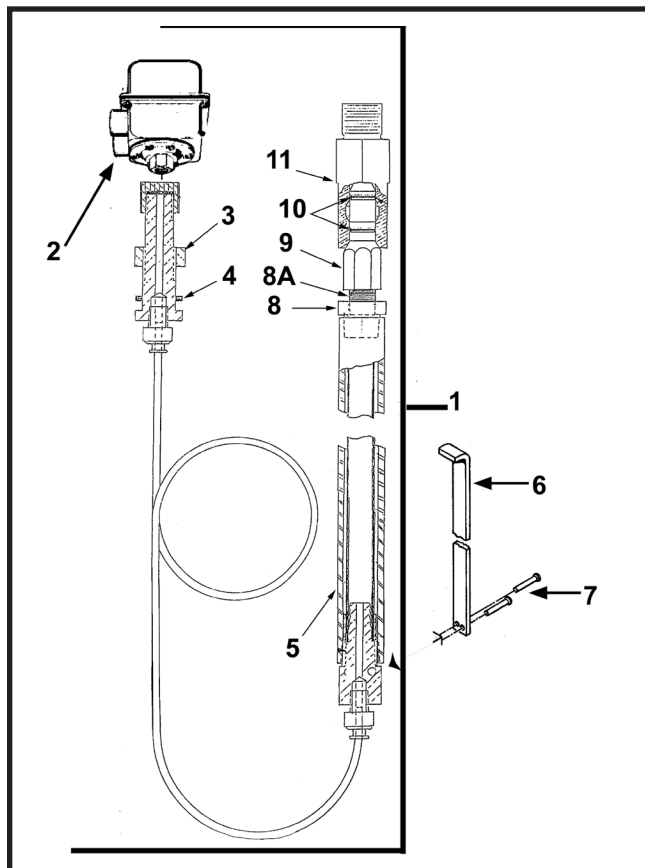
EXPLODED VIEW OF AWRPA CONTROL KIT
